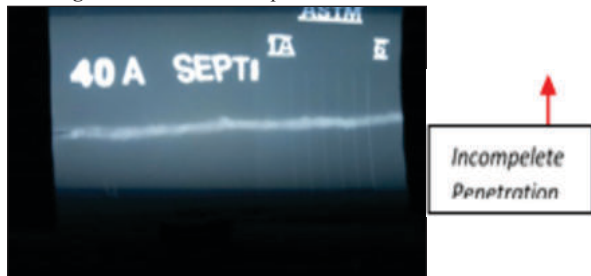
Welded joints of SS 304 plate number 1.
